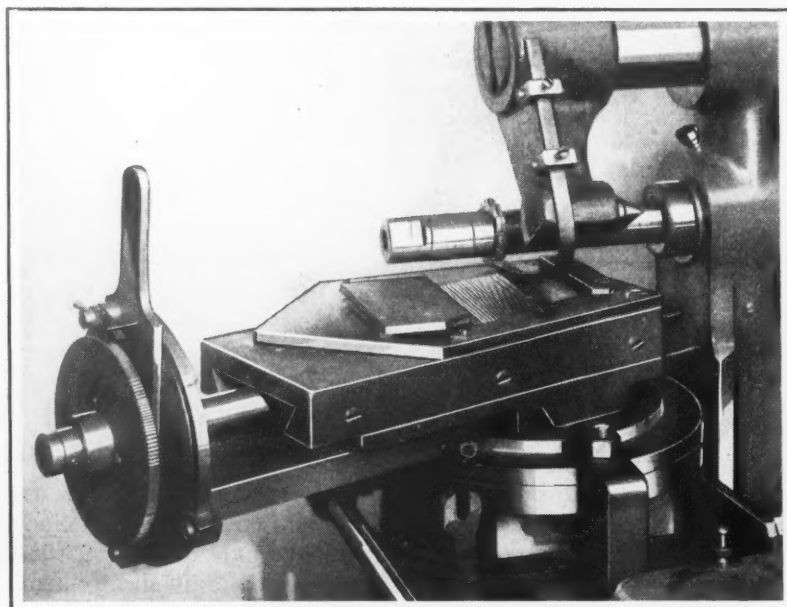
How the Machine is Set up for Cutting the Teeth of Gear Racks
